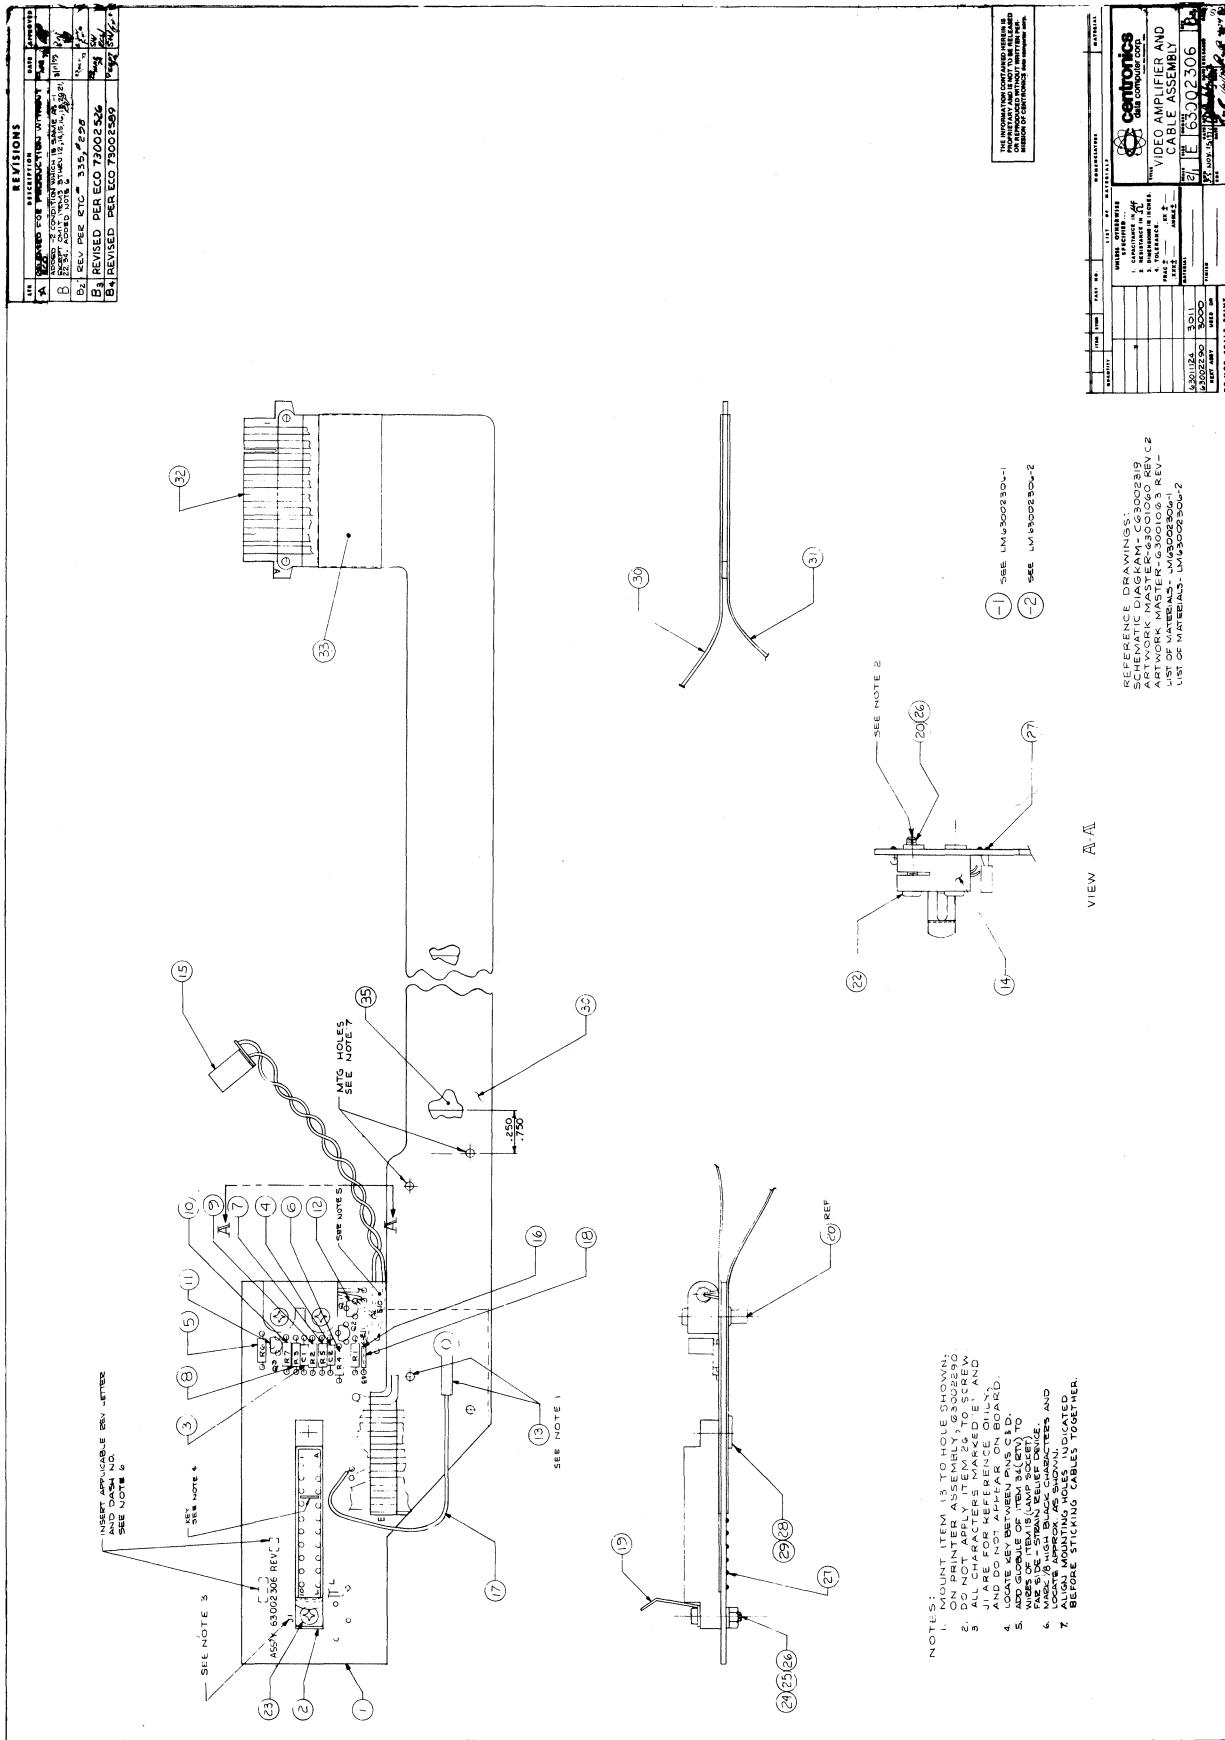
COMPONENT BOARD ASSEMBLY, VIDEO AMPLIFIER
